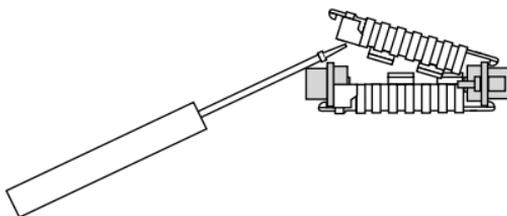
Using a small screwdriver to open the TTL Converter case.
